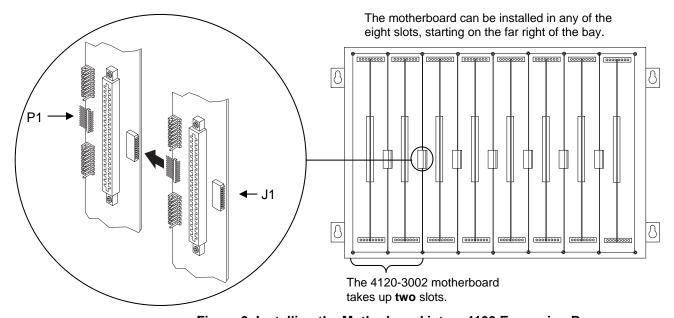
Installing the Motherboard into a 4100 Expansion Bay
